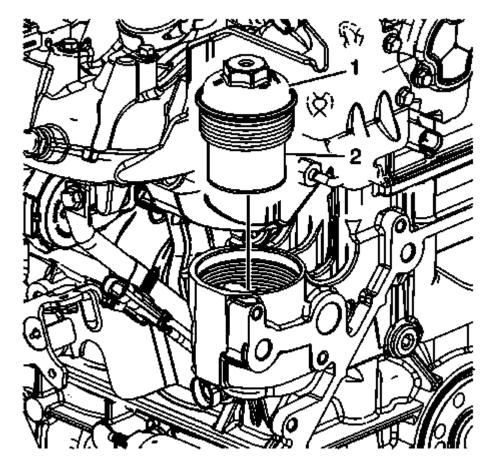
Engine Oil Filter And Cap Courtesy of GENERAL MOTORS COMPANY
